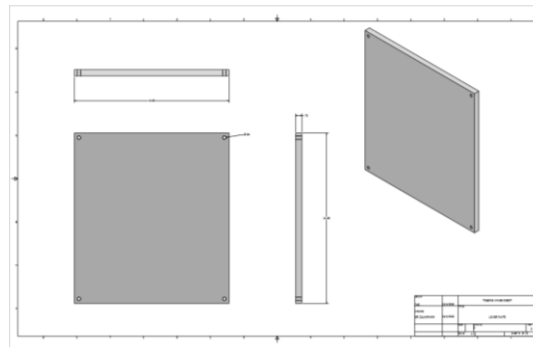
Bottom Board - The bottom board is a board that serves as a place to place electronic materials such as batteries, arduino and other electrical components.
